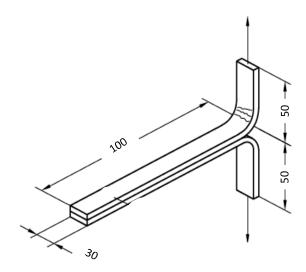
Adhesive joint for peel test (dimensions in millimetres)
